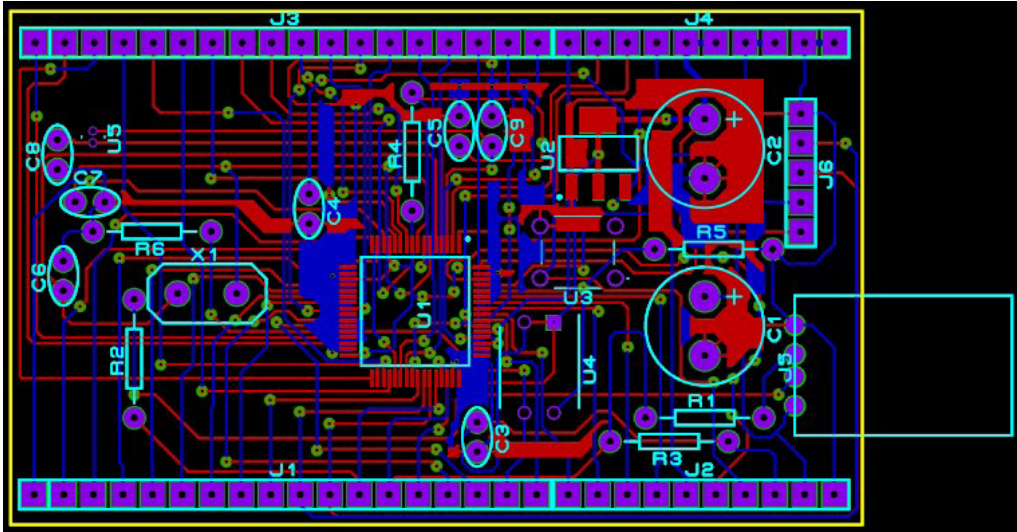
The PCB layout for the proposed STM32F103RET6 microcontroller header board
